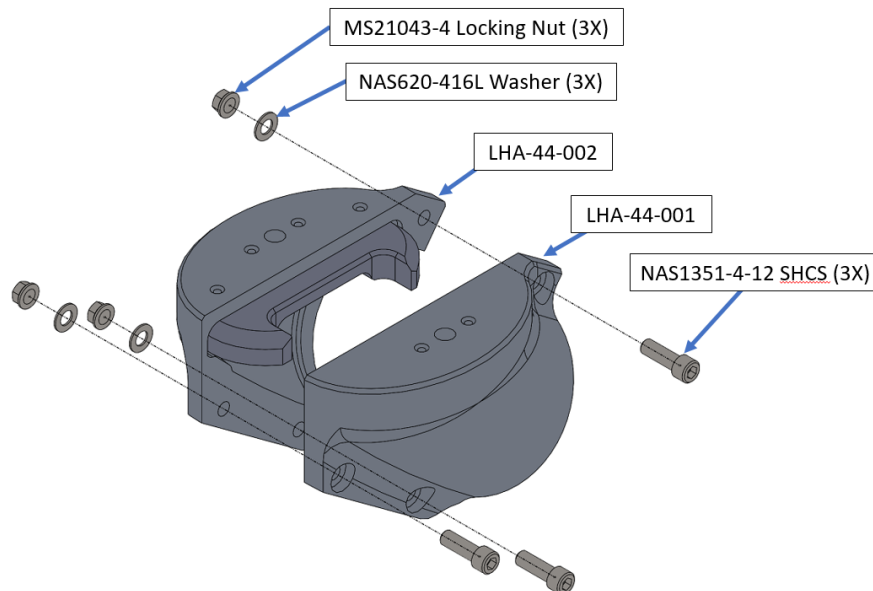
Assembly of the Forward Attachment Landing Gear Skid Clamp
